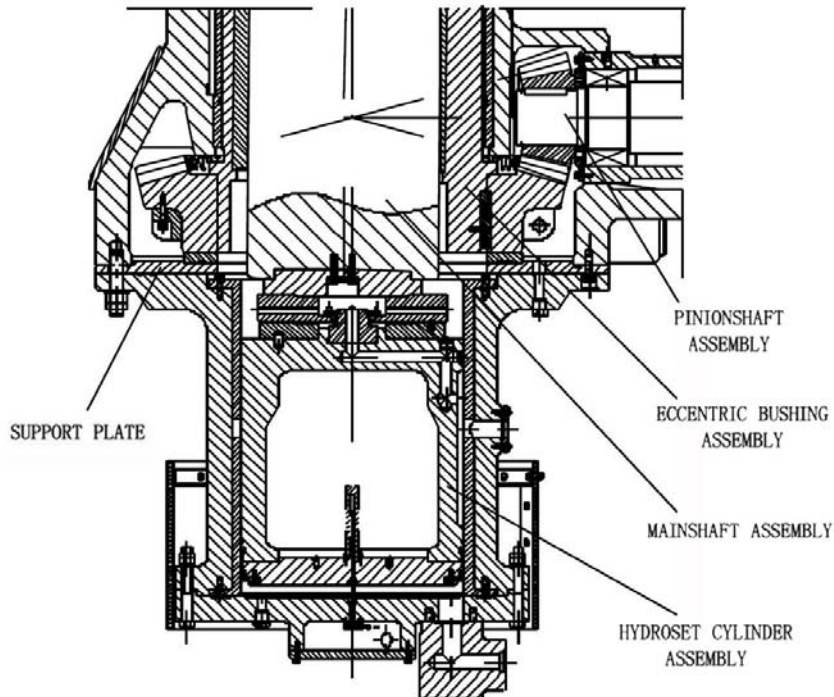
PXZ-1500II gyratory crusher cylinder assembly drawing
